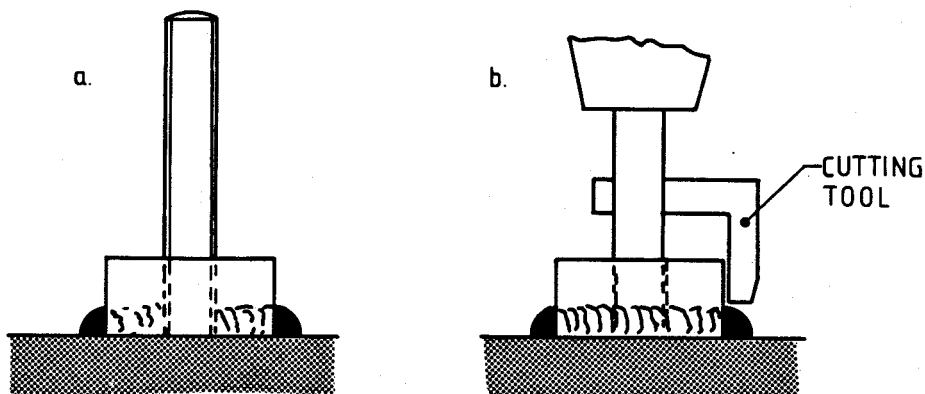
FILLET WELDED SPOOLS
